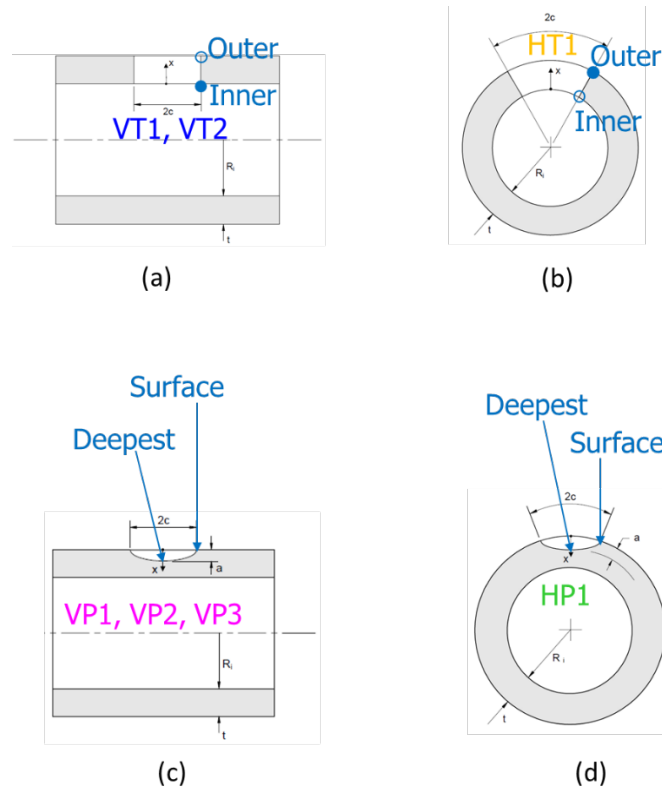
Large plate starter crack configurations: Type (a) VT1, VT2: through-wall crack across the weld; Type (b) HT1: through-wall crack parallel to the weld edge; Type (c) VP1, VP2, VP3: semicircular ($a = c$) part-through-wall crack perpendicular to the weld edge; and Type (d) HP1: semi-circular ($a = c$) part-through-wall crack parallel to the weld edge
